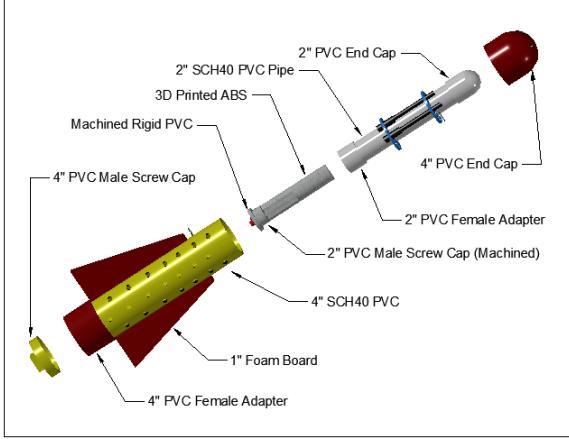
A protective outer cylinder with holes was used to house the inner cylinder.
